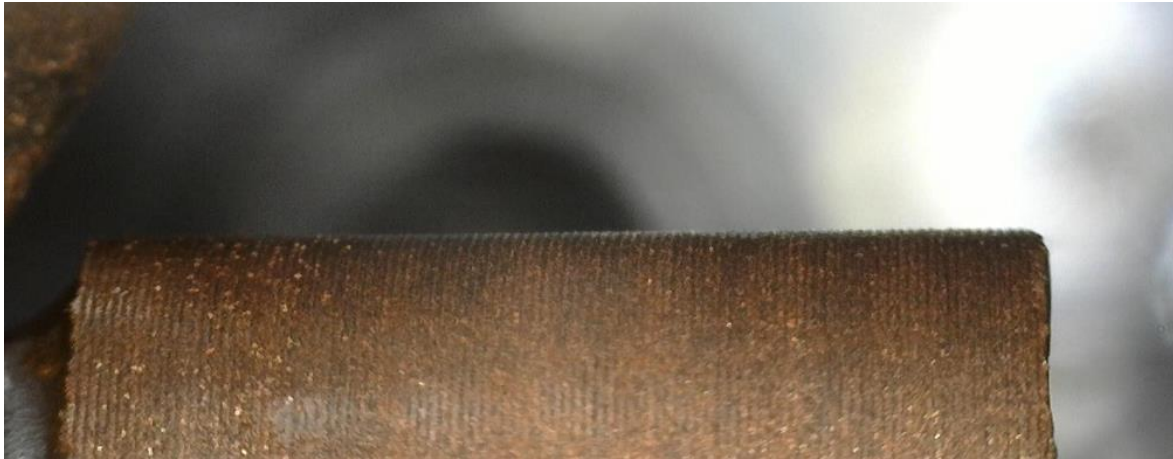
Grinding wheel after dressing with close spaced helical grooves visible
